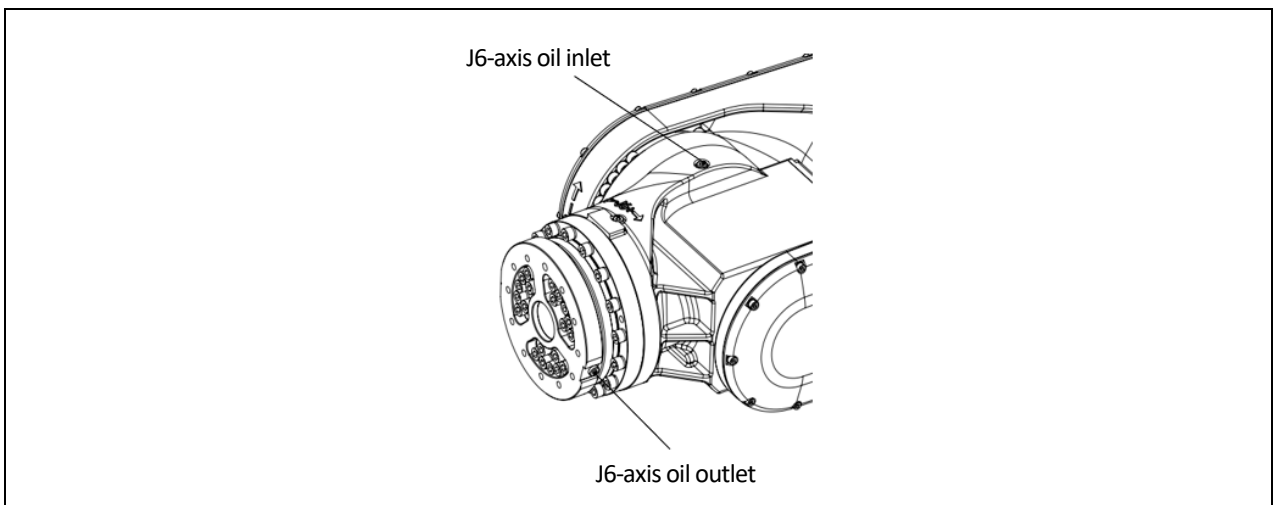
J6-axis oil inlet/outlet (ER270-2700)
